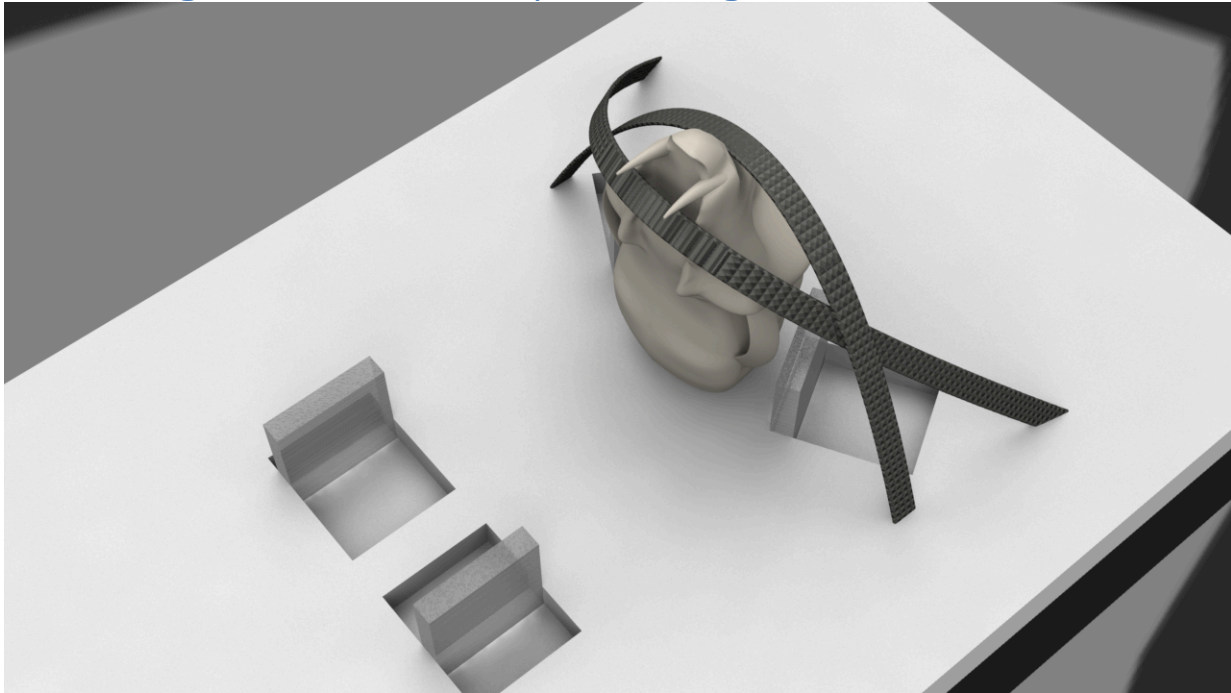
SolidWorks drawing of Band/Track design. Sketch produced by Gabriel Bautista.
